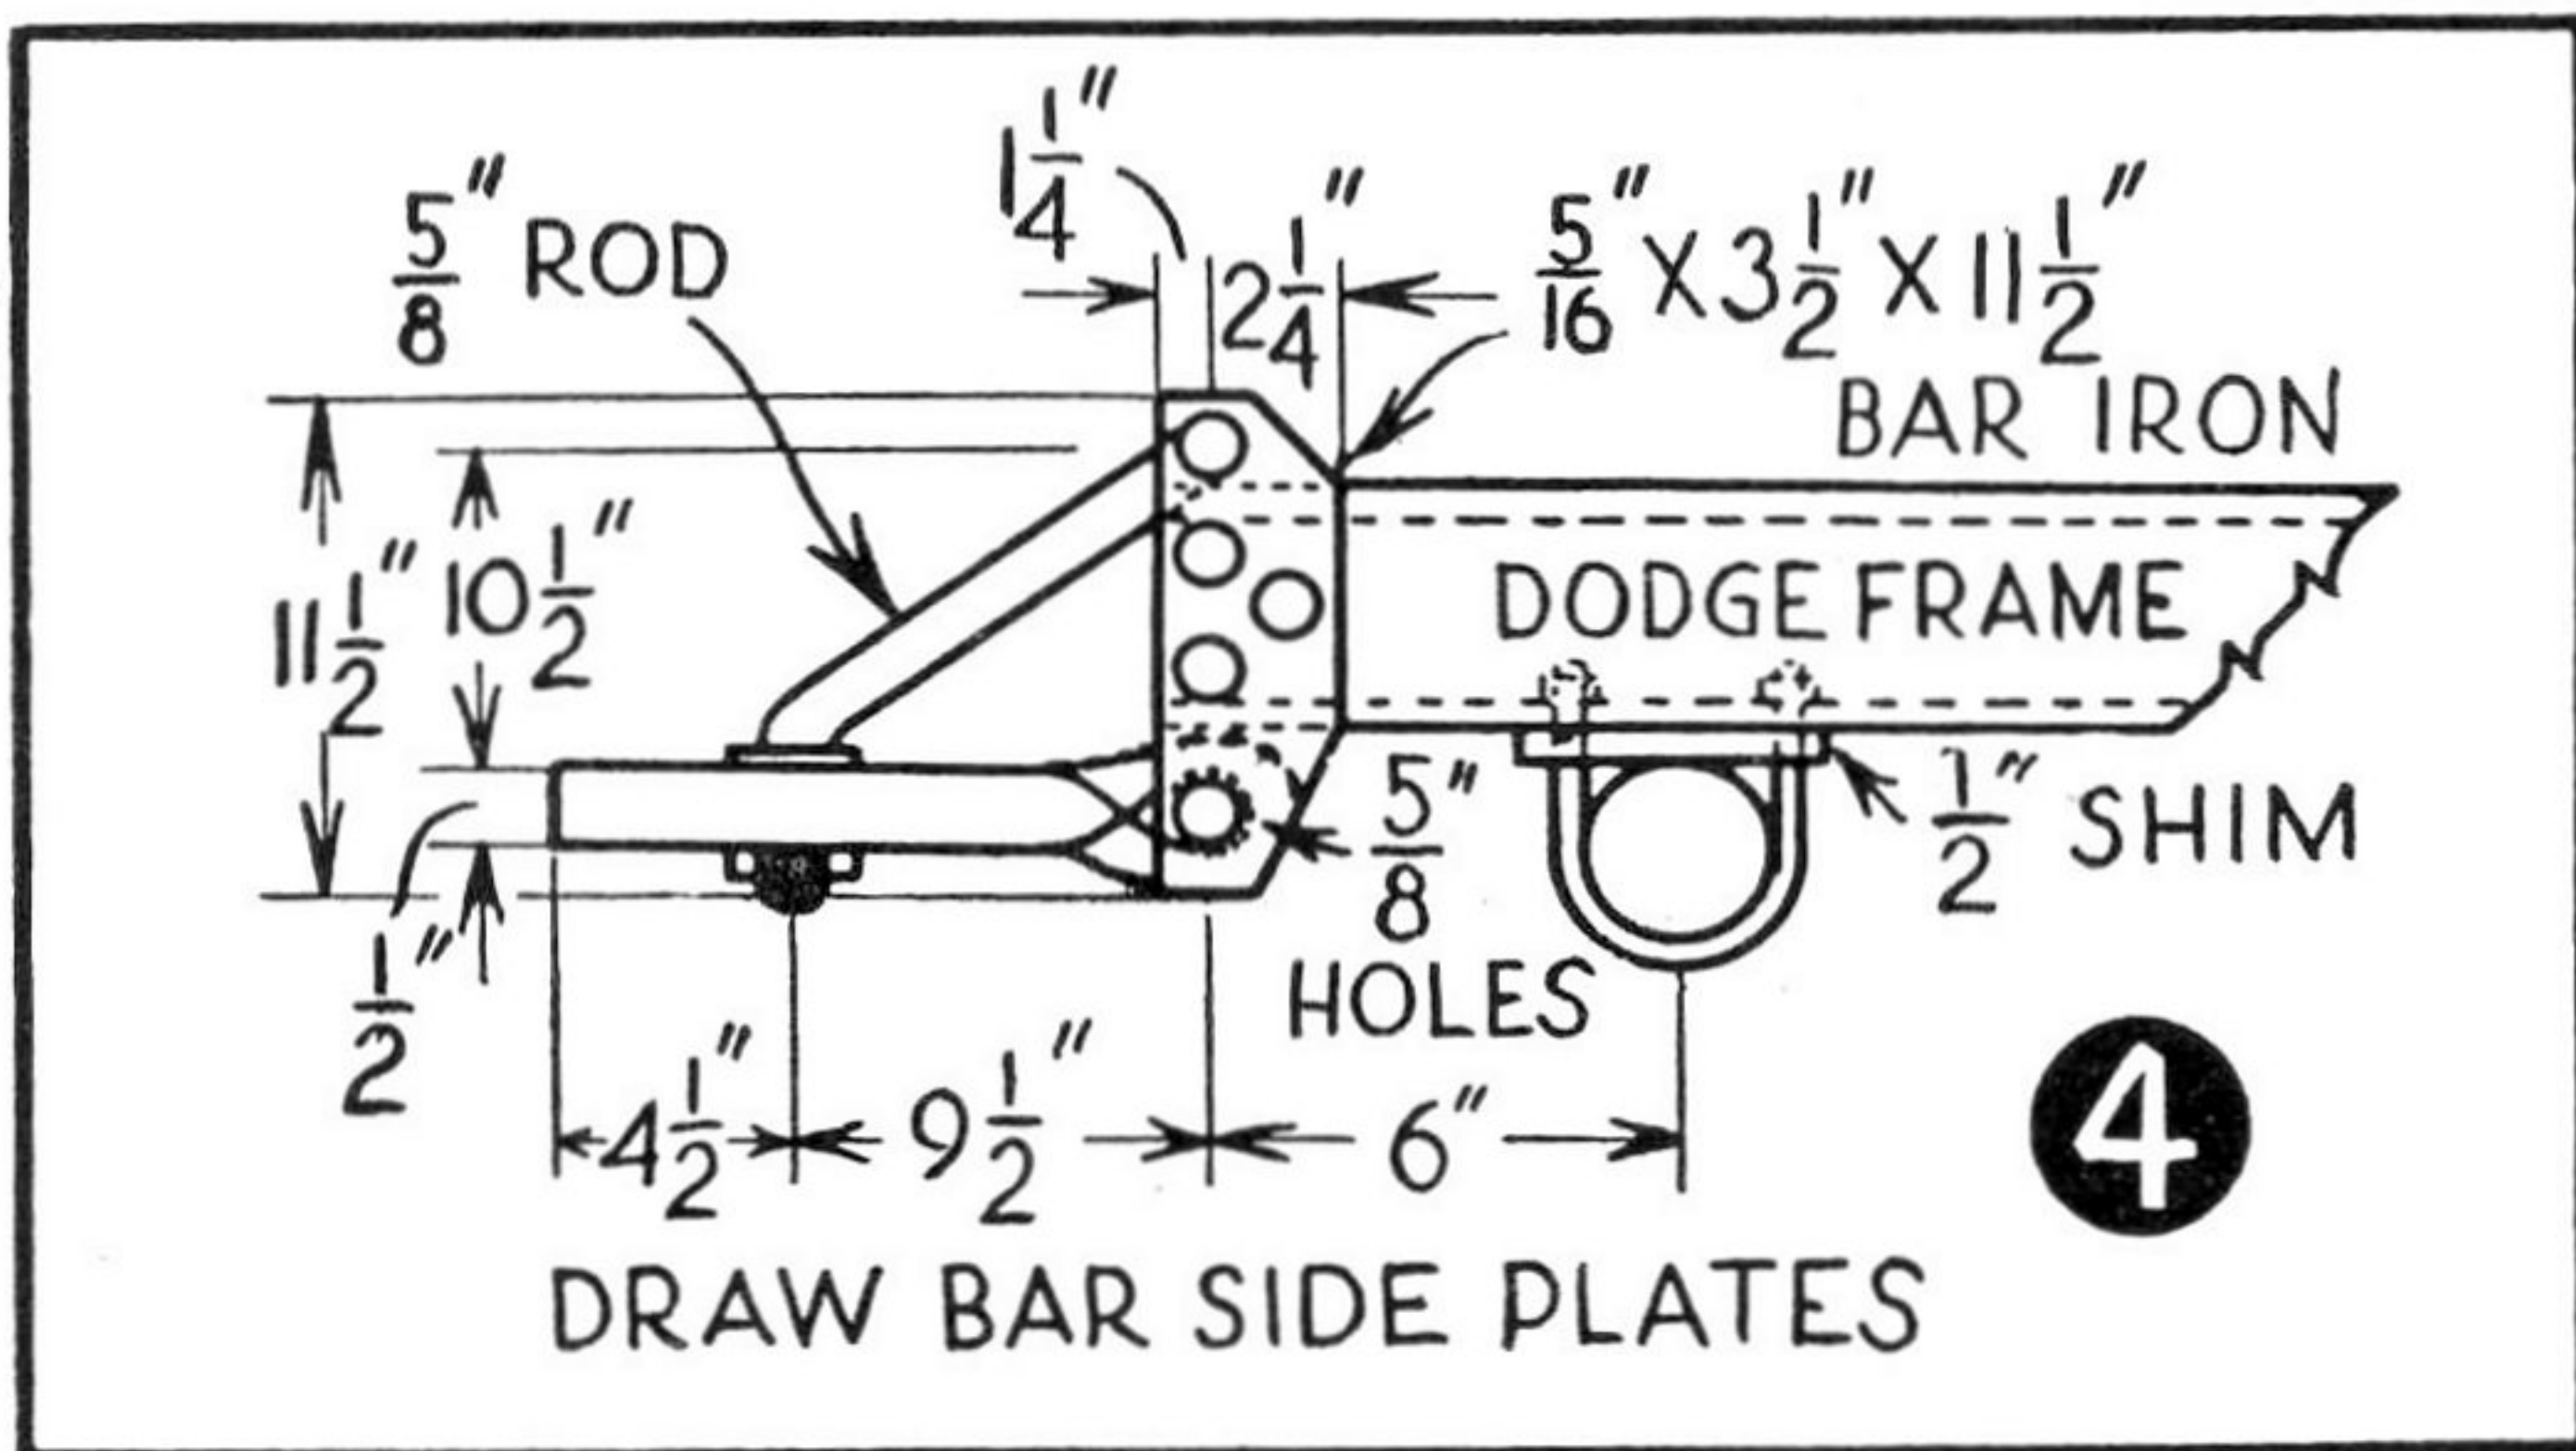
Details of reconstructing rear end of frame to receive the universal drawbar for general hauling and towing harrows, cultivators, etc.
